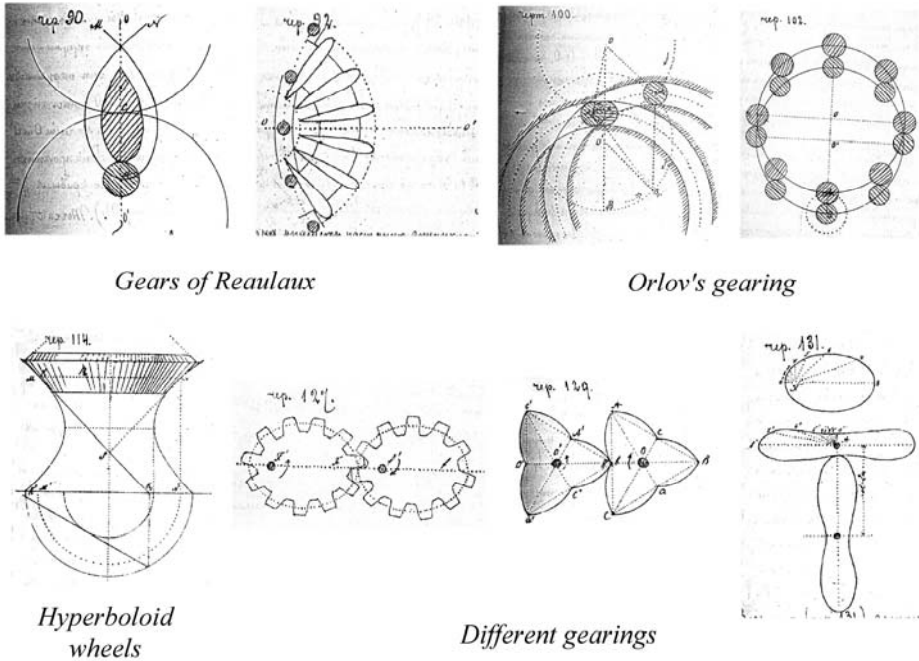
Examples of moving transmission by direct contact (gearing)
